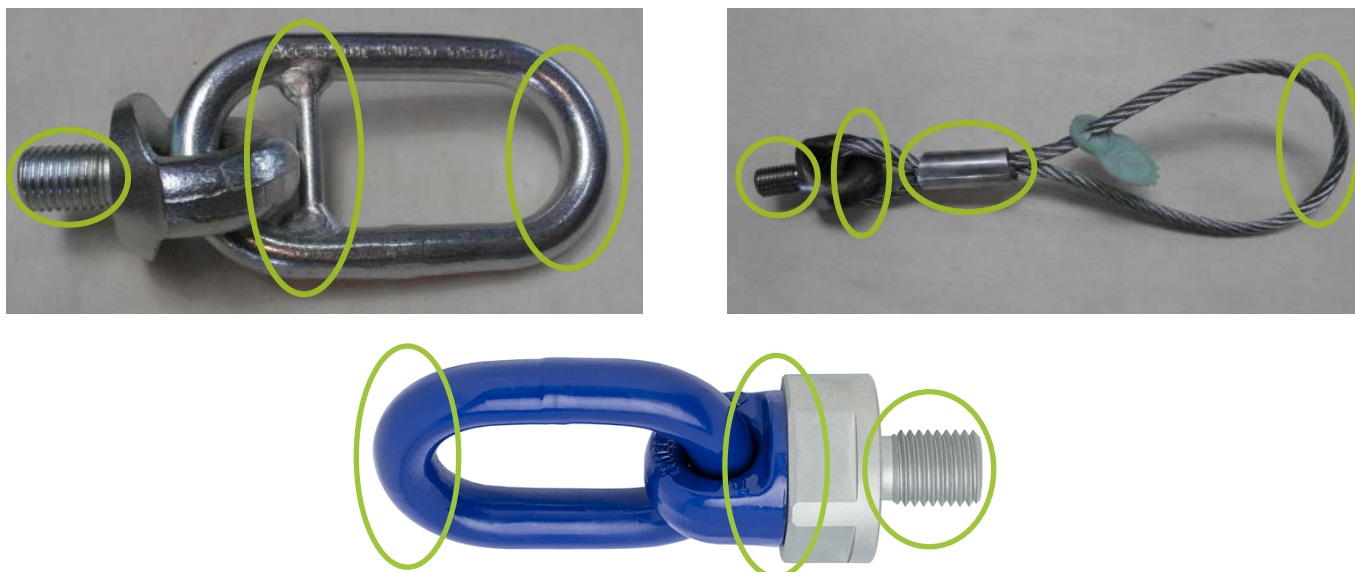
Inspection areas (Threaded bolt / lifting ring or loop).
